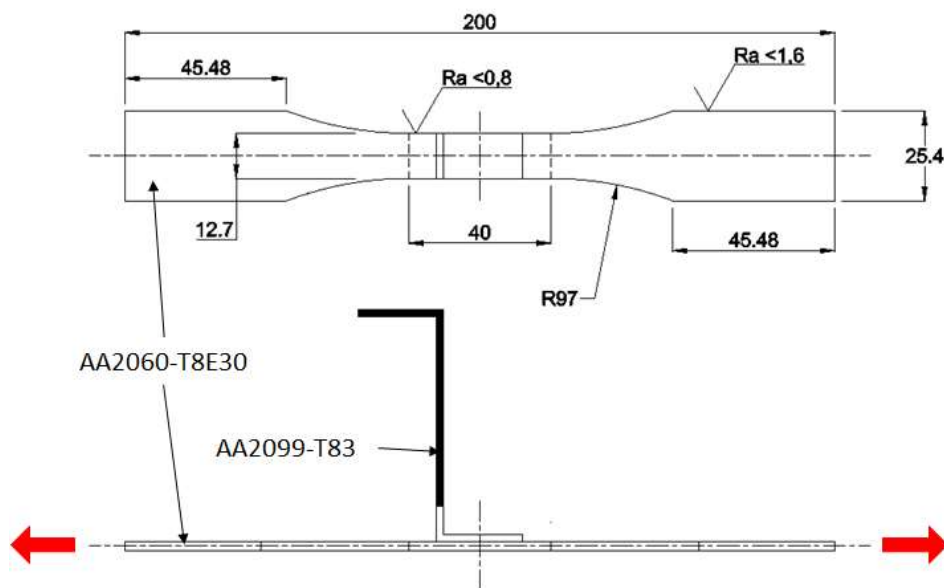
Sketch of the specimens machined from the FSLW joint-coupons C1-C6 for the static tensile and fatigue tests under hoop-stress loading conditions.
